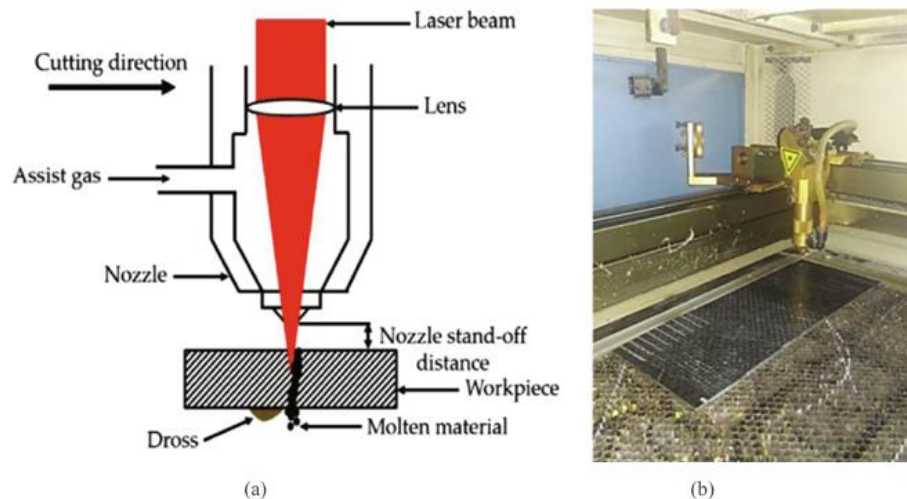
Laser cutting (a) illustration of CO₂ laser, (b) actual laser cutting setup [8]
